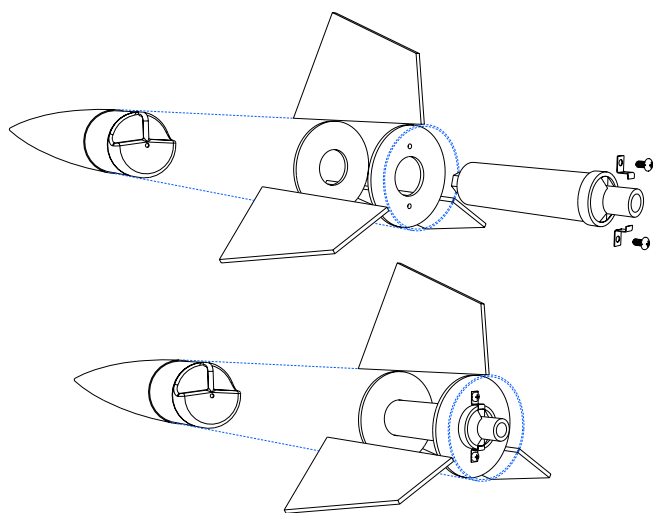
Two centering rings, and some clips to hold the motor in make a simple motor mount.
